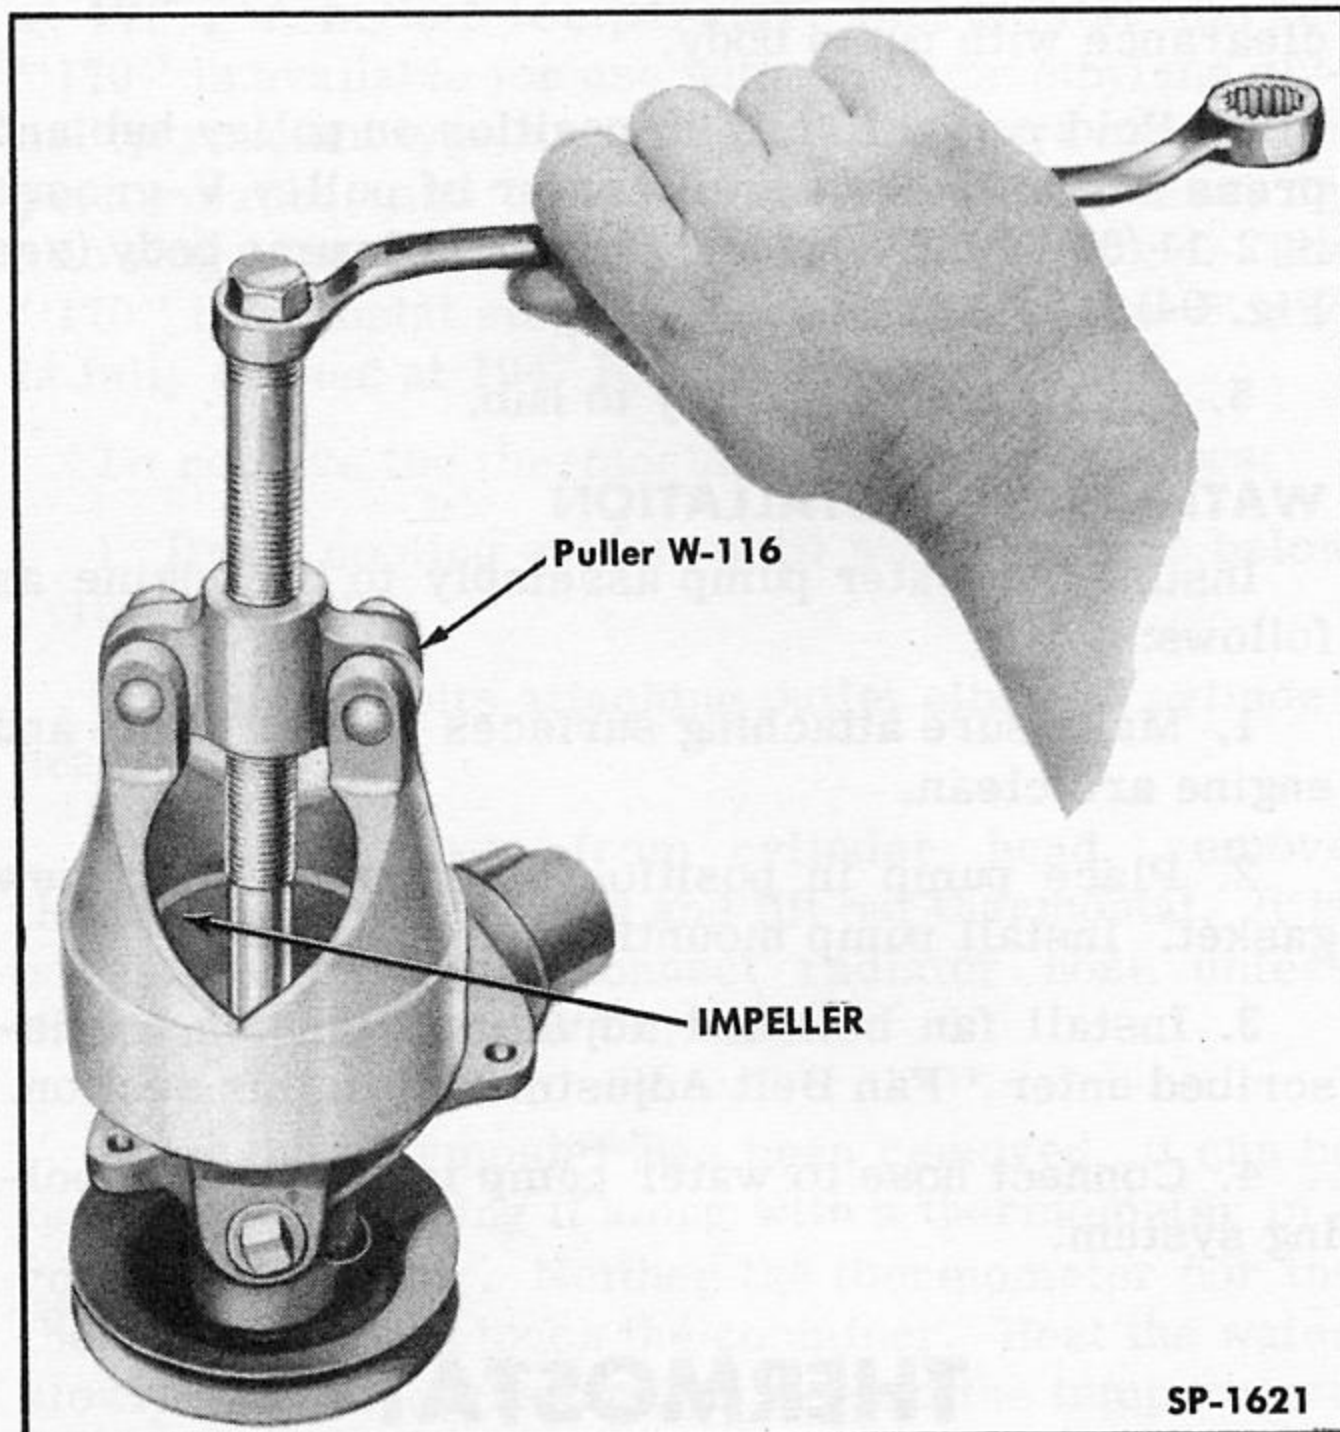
Removing Water Pump Impeller—4 Cylinder
